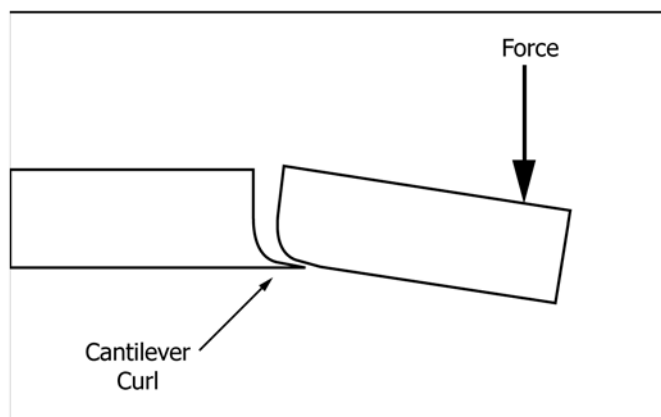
Cantilever Curl, Formed on the Compression Side Under a Bending Stress
